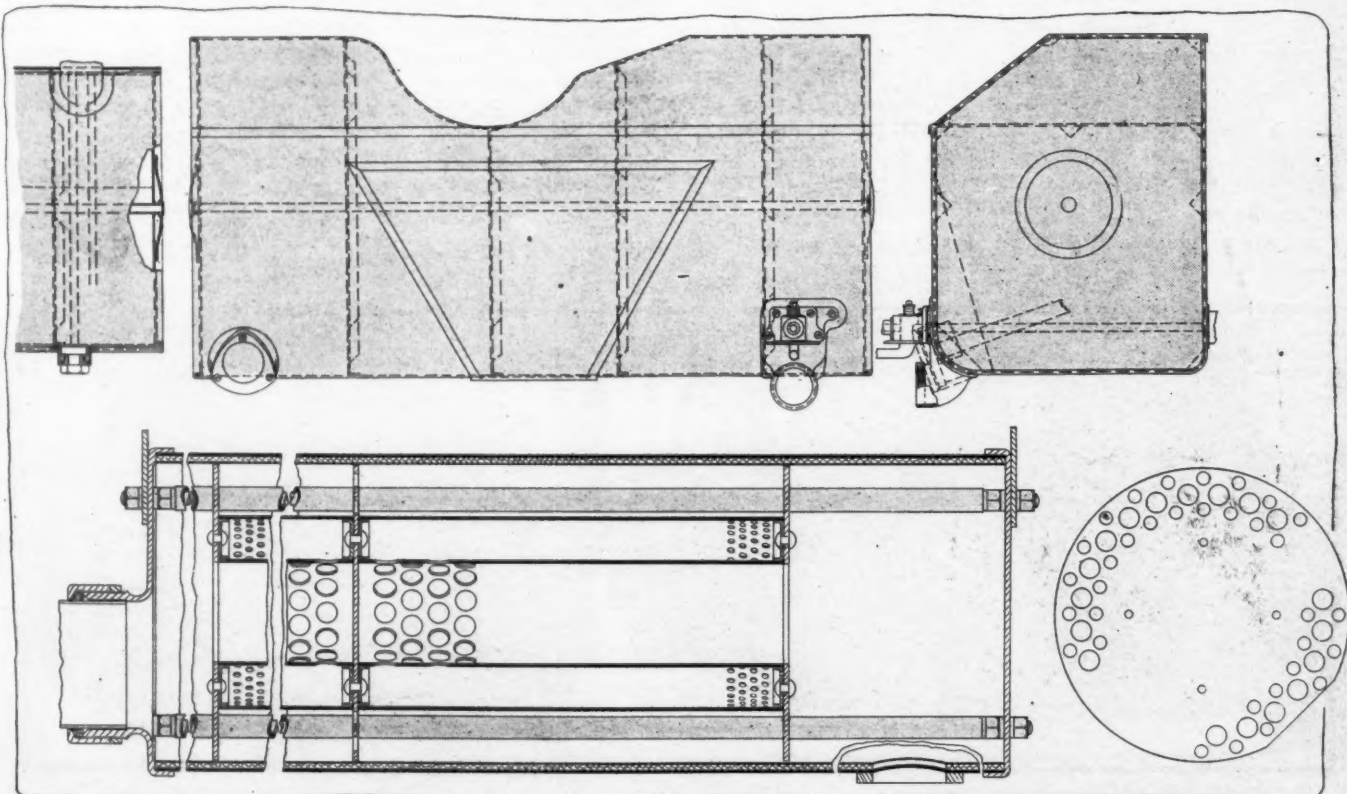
Constructional view of new pressure feed gasoline tank and section through the new perforated muffler
